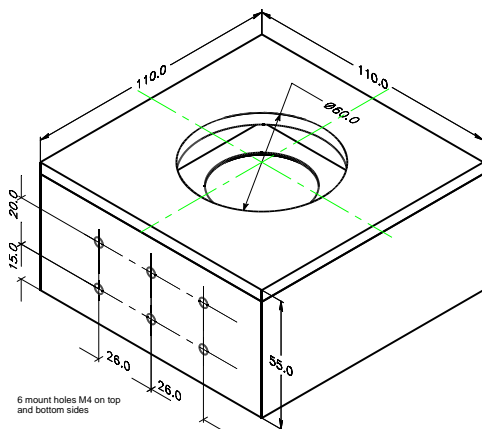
Technical drawing of the package and mounting holes of the 40mm 59/79-channel MMDM
